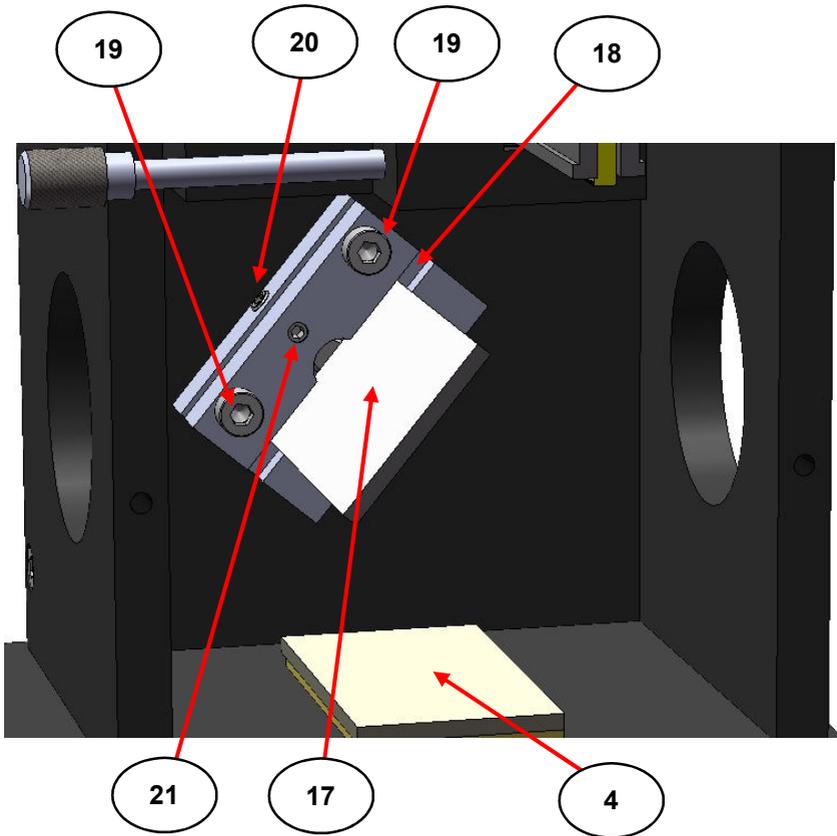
Minidiff Plus Adjustable Mirror Assembly Detail
